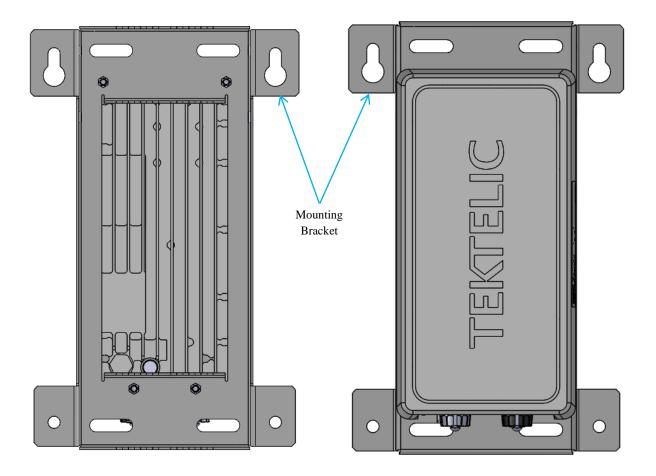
Kona Macro Gateway Module with Mounting Bracket
